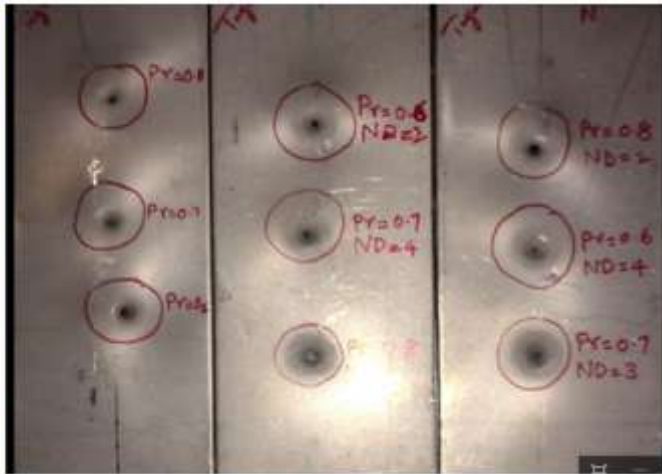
Taguchi Test Specimen (Hastelloy C-276)
